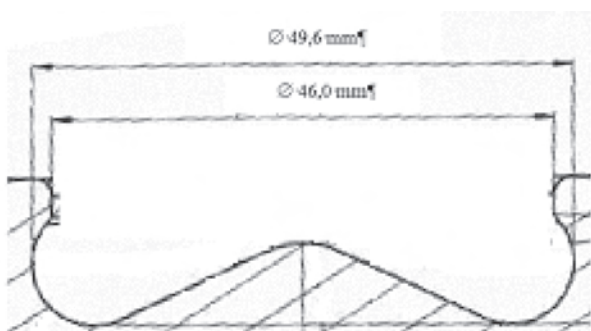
Piston bowl geometry A, with a piston bowl diameter of 49,6 mm and a piston bowl neck diameter of 46 mm
